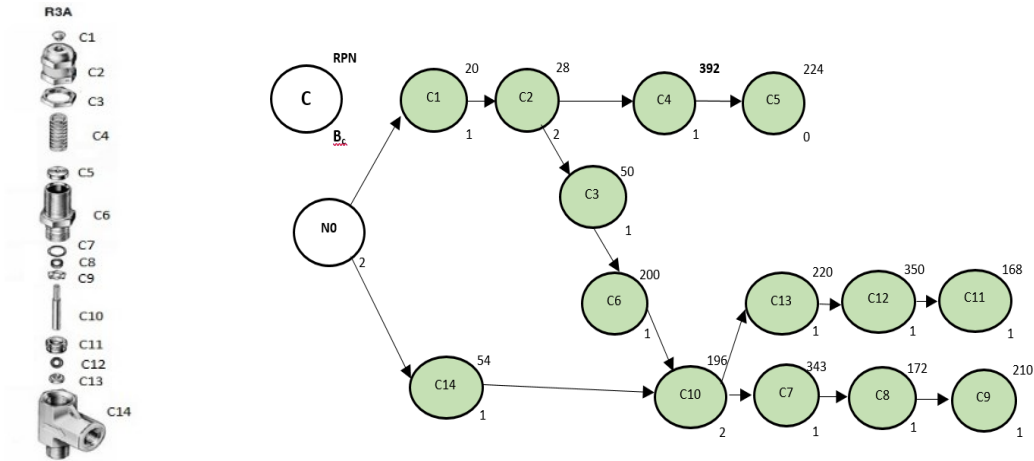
, Disassembly Precedence Graph for R3A pneumatic valve and valve exploded view [42].
